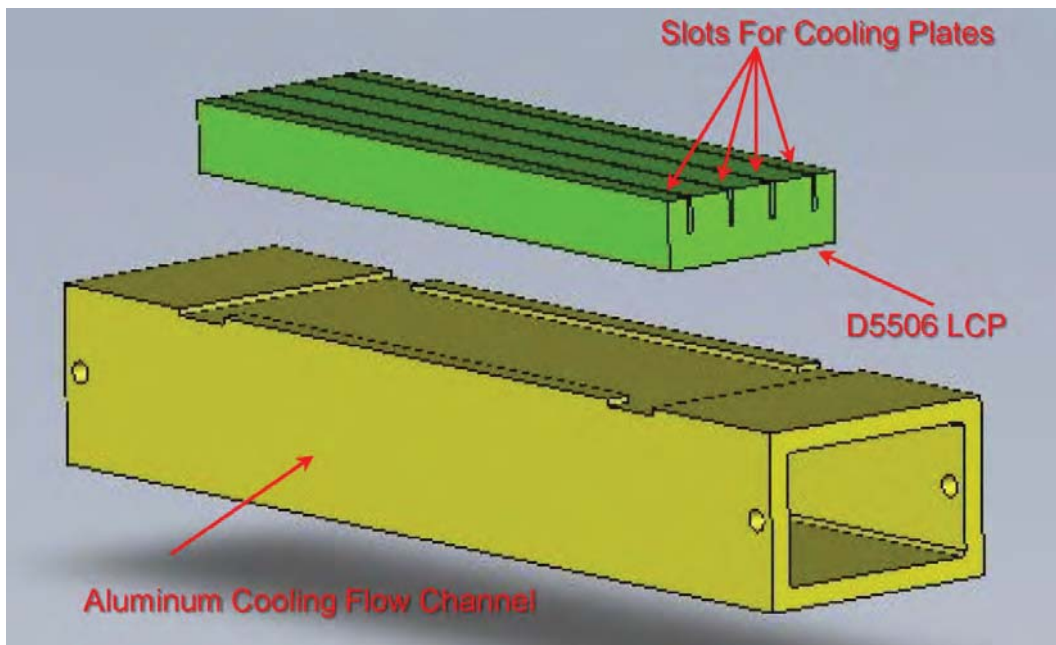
D5506 LCP Manifold Components and Arrangement
